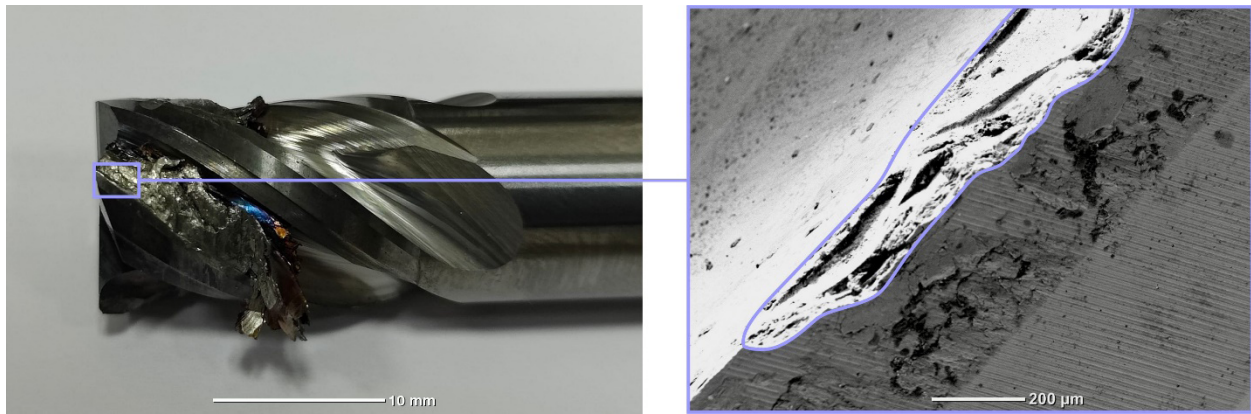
Appearance of a mill prematurely removed from testing and a fragment of the cutting-edge wear
